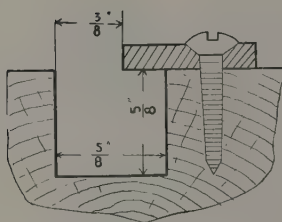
Standard Size Grooves for Ring Fixtures.
